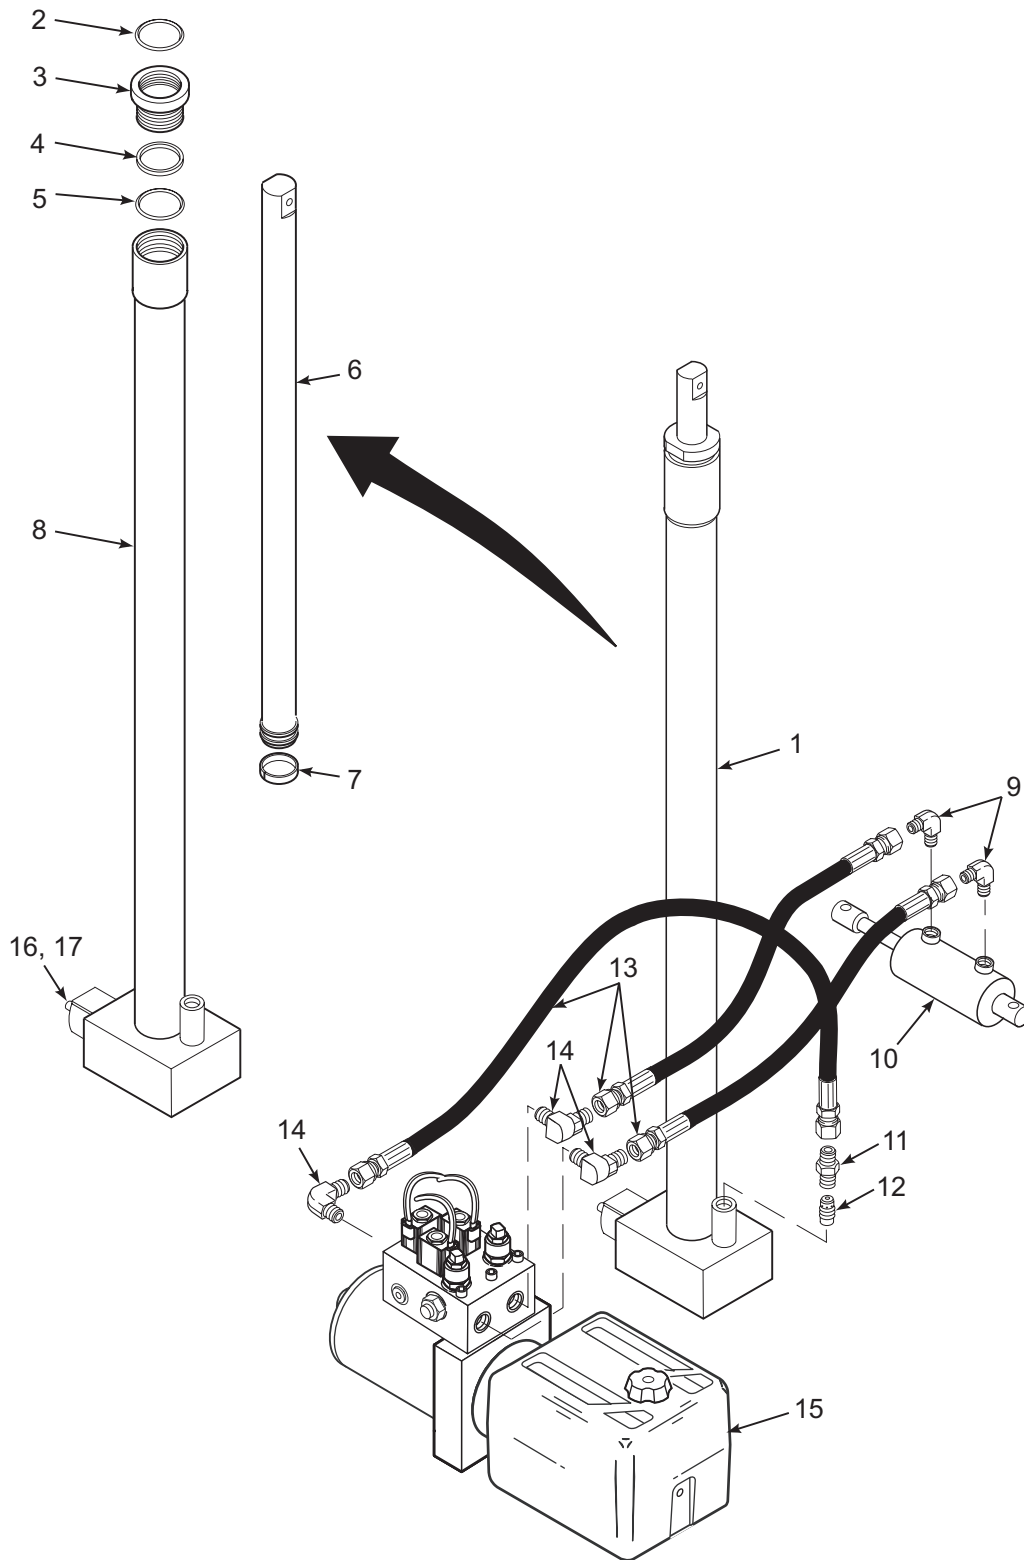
Hydraulic Cylinder, Fittings, and Hoses
